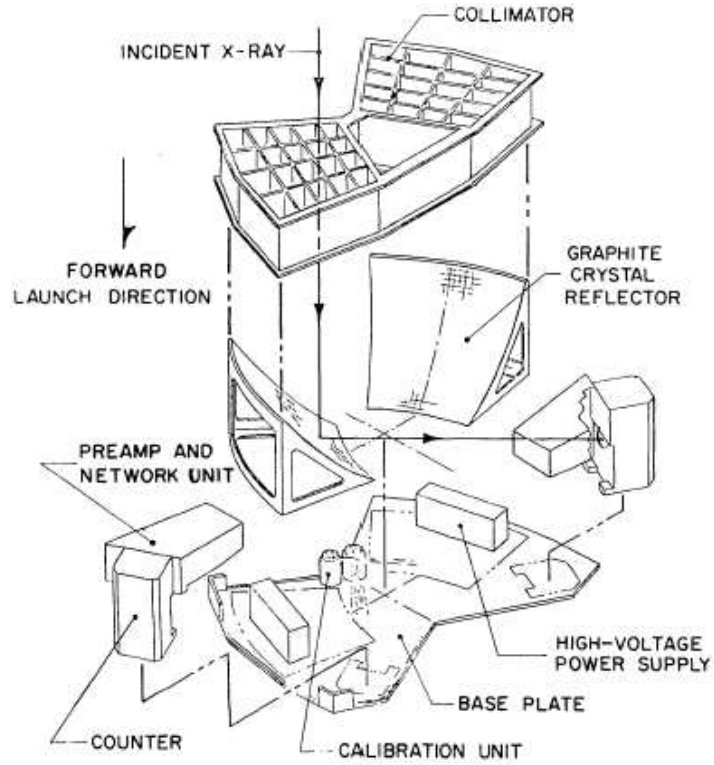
Exploded view of OSO-I polarimeter assembly.
